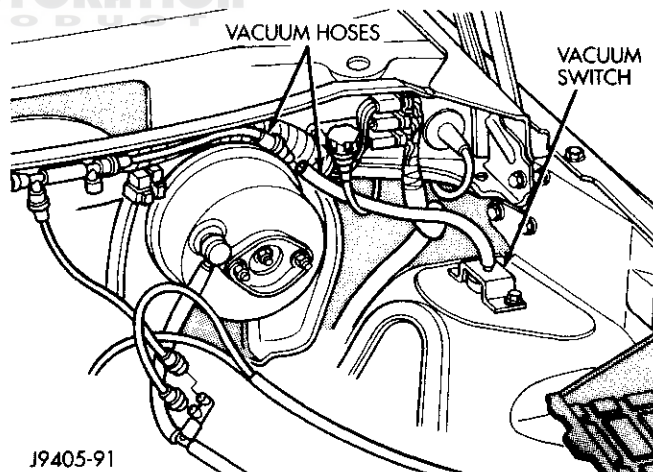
Diesel Vacuum Switch Location (Without ABS)
